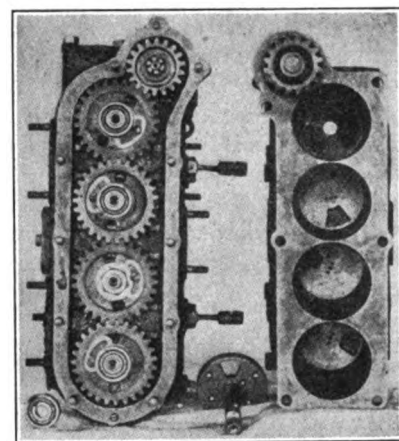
SHOWS THE FOUR-CYLINDER MOTOR
